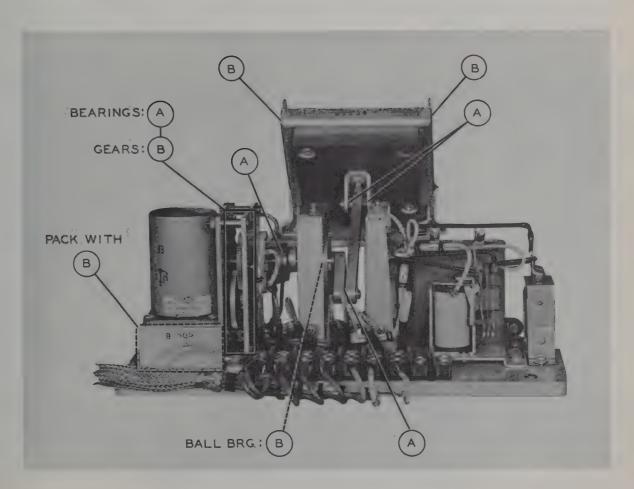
Lubrication of PA Plate Tank Shorting Drive Unit.
